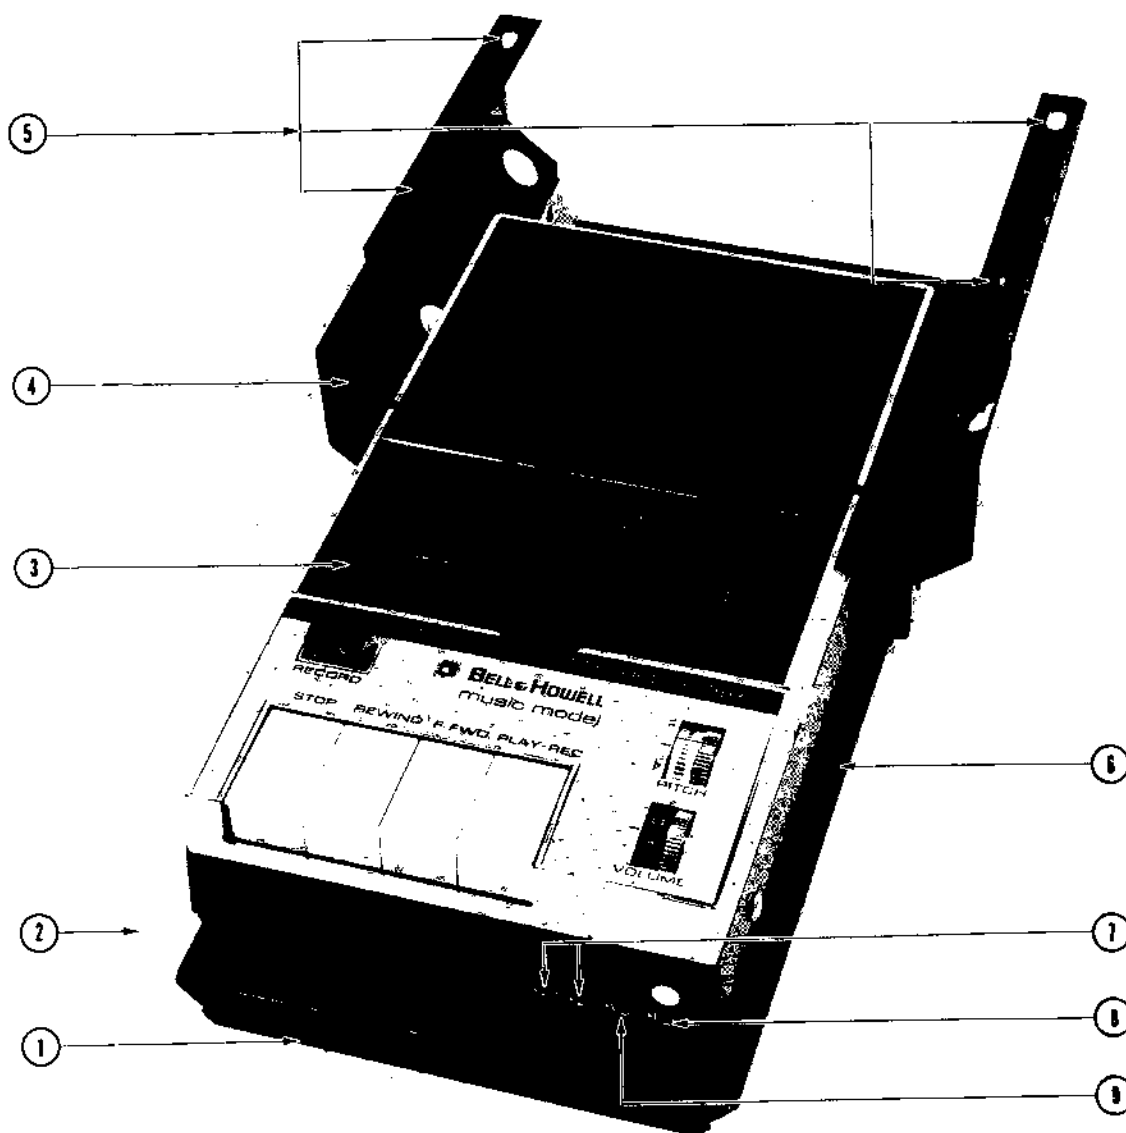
CASSETTE DRAWER FINAL ASSEMBLY
